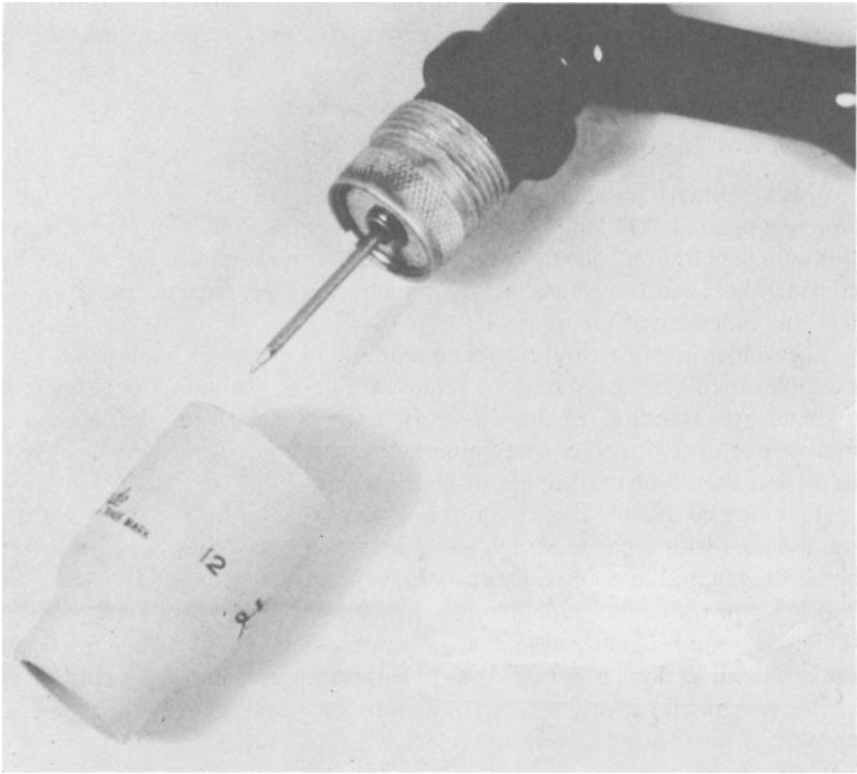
Recommended GTA welding torch with gas lens device. The gas cup has a 19-mm (3/4 in.) inside diameter.
